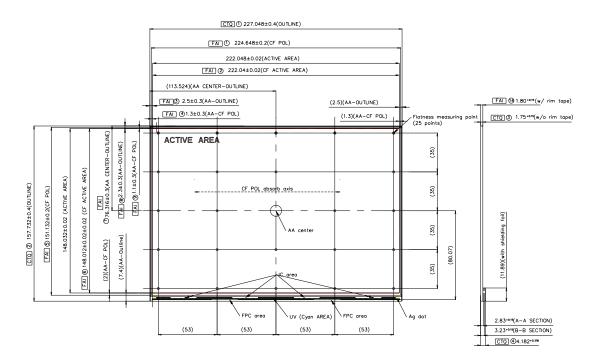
TFT-LCD Module Outline Dimension (Front View)
